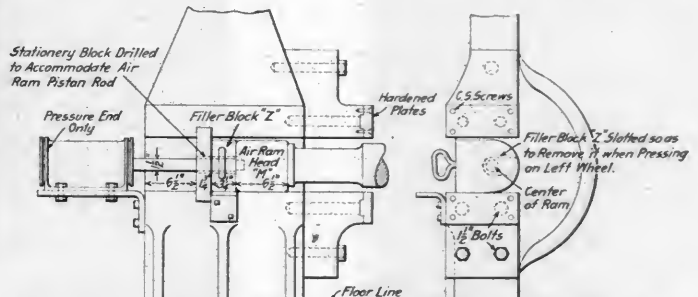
Arrangement of Outboard Housing for Mounting Press
